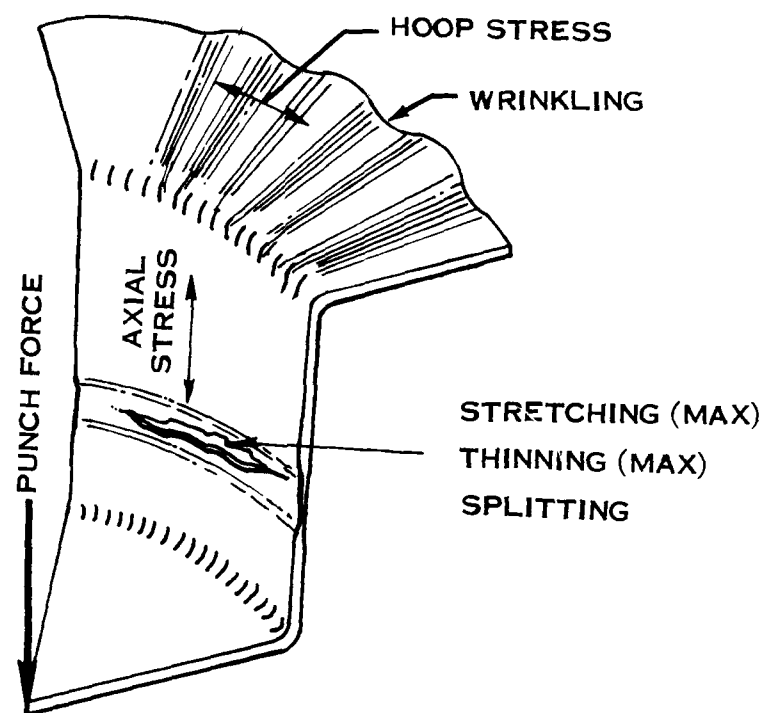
FAILURES FOR DEEP DRAWN PARTS
